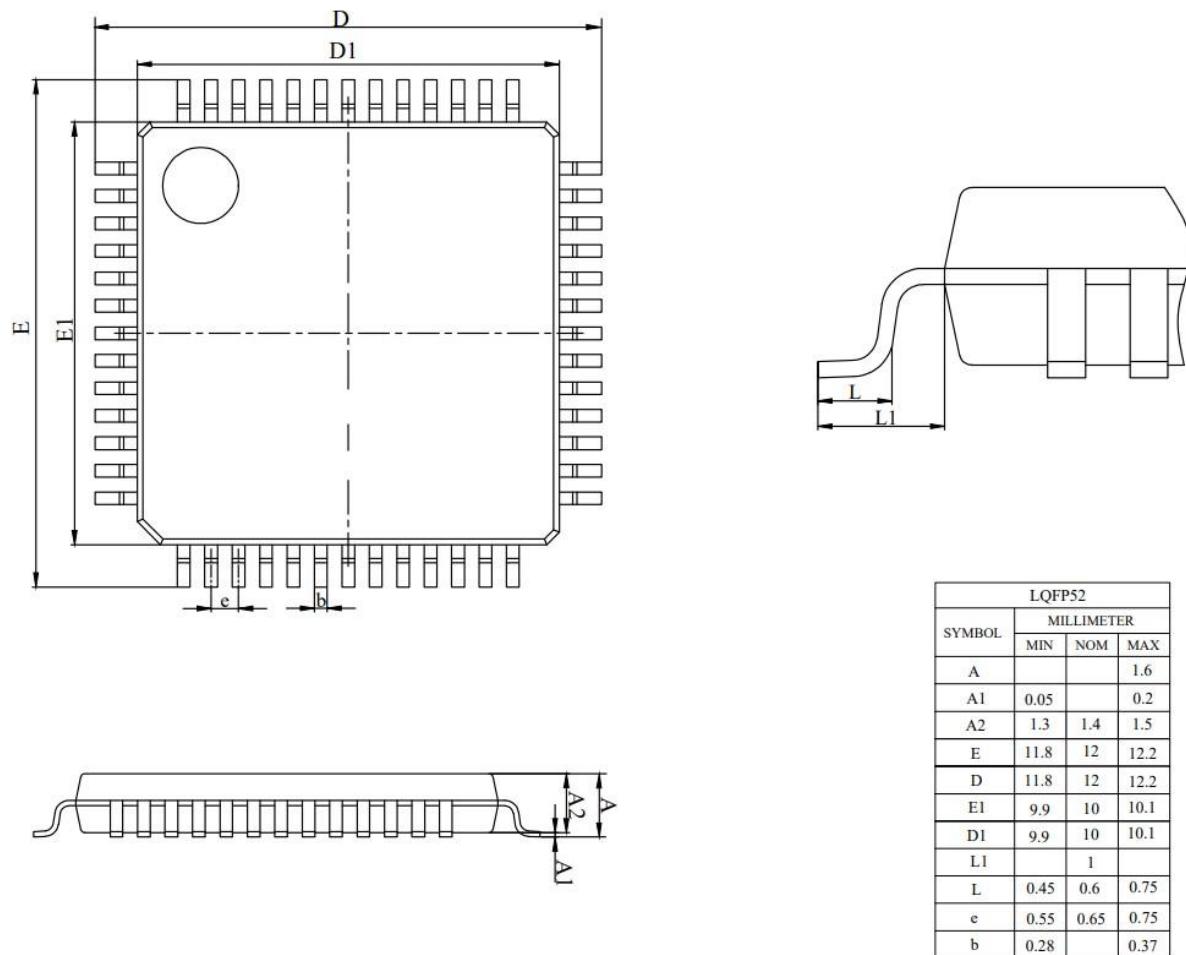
LQFP52_10X10 Package Drawings and Dimensions
